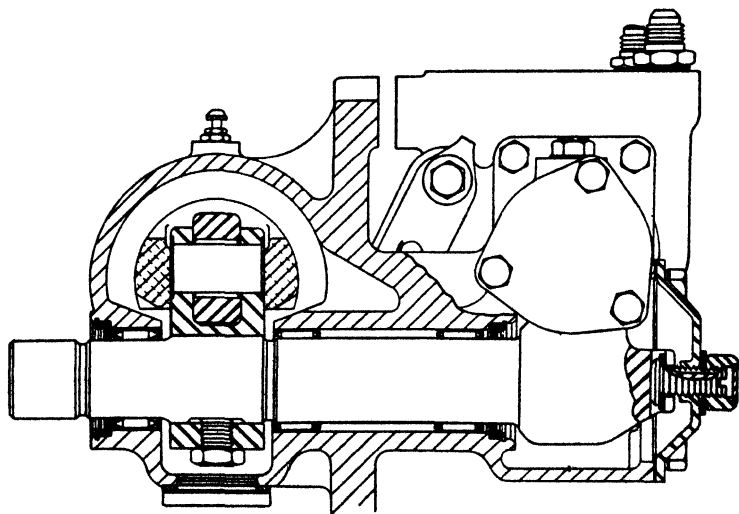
GEMMER HYDRAGUIDE, SECTION THROUGH AXIS OF PITMAN SHAFT.
